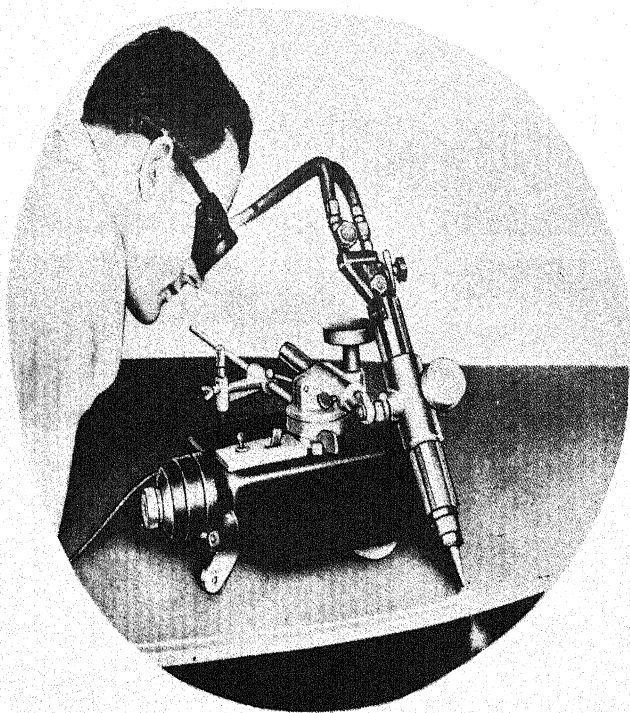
Making a bevel cut on a circular path with a special cutting machine
